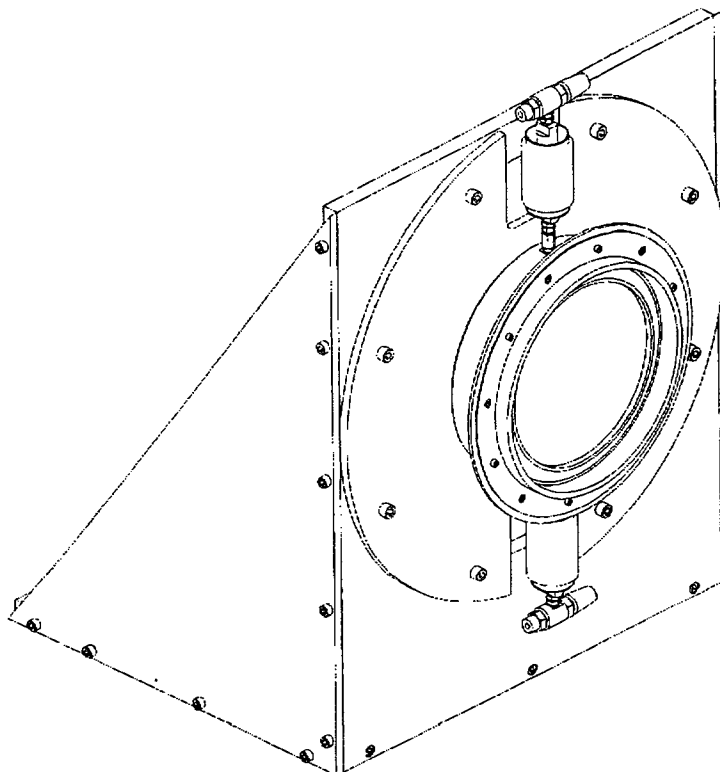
CELL #4 FILL STAND ASSEMBLY
